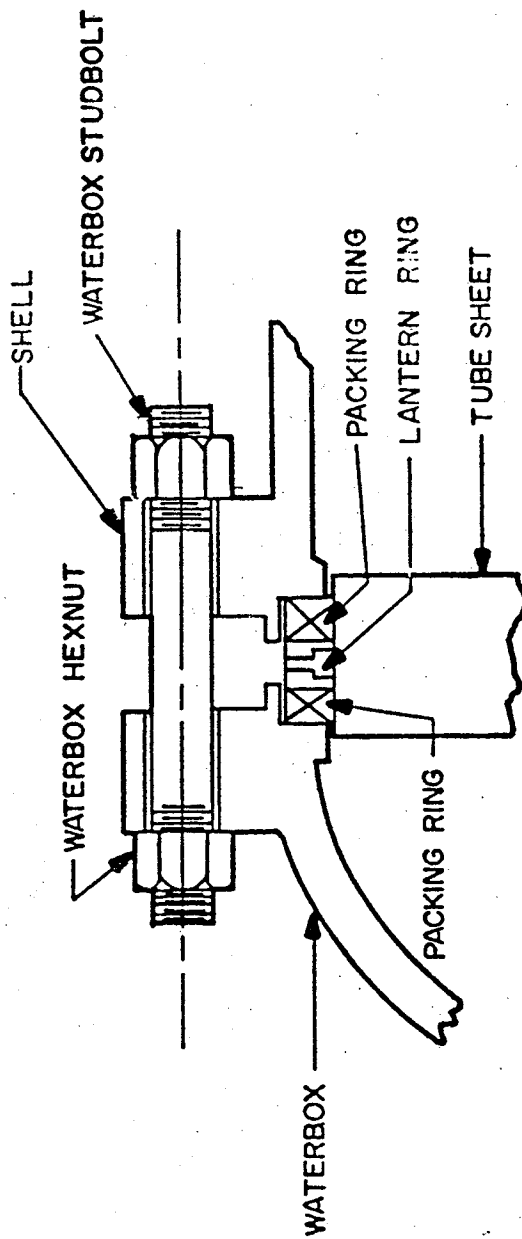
Straight tube, floating head, removable bundle, outside packed lantern ring construction.
